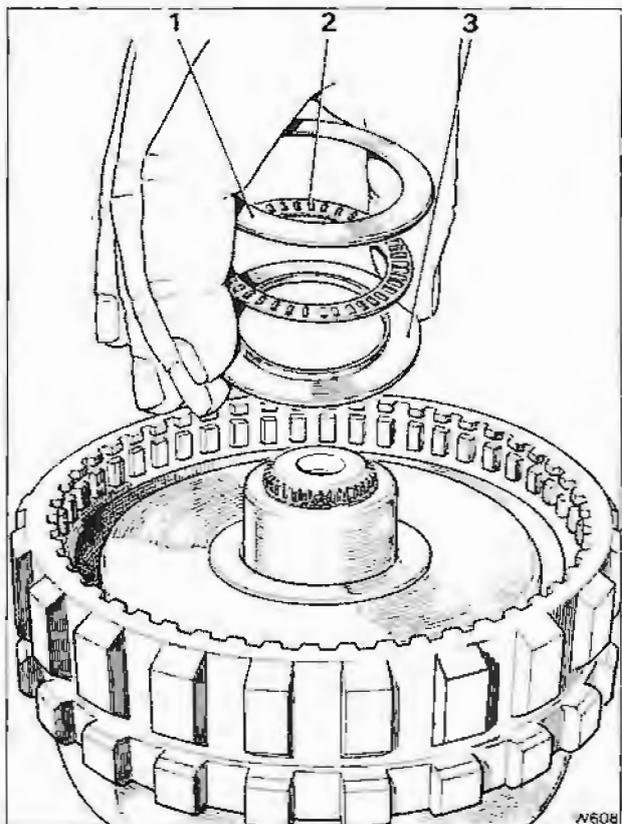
Fitting the races and thrust bearing to the outer face of the rear internal gear
